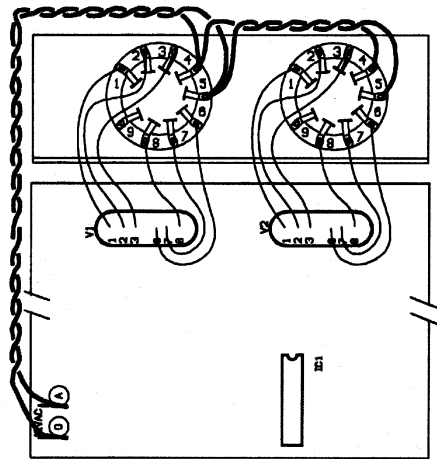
The wires that carry power to the tube filaments are twisted together to reduce magnetic fields. The insulated sleeving used on the other wires is not shown here.
